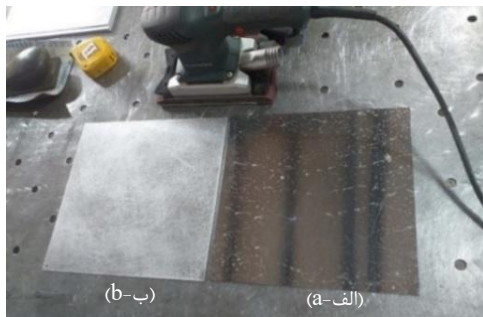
Two cut aluminum sheet specimens of 5052 alloy; a) Smooth and polished. b) Rough and sanded.
